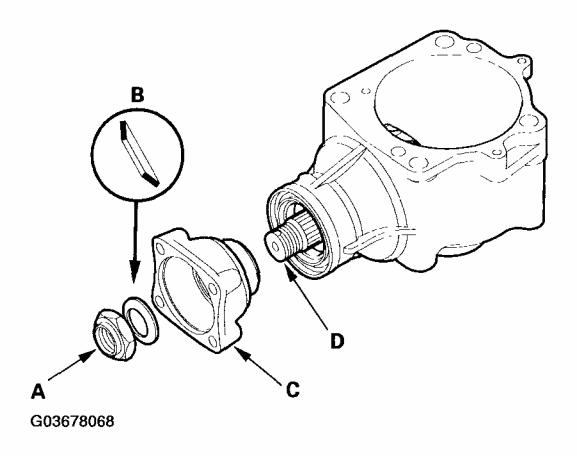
Removing Locknut, Conical Spring Washer, And Companion Flange From Transfer Driven Gear Courtesy of AMERICAN HONDA MOTOR CO., INC.
